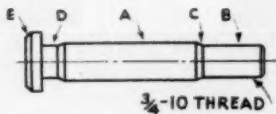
THREADING BOLT AT 2000 RPM WITH CARBIDE CHASERS IN A TANGENT DIE HEAD
